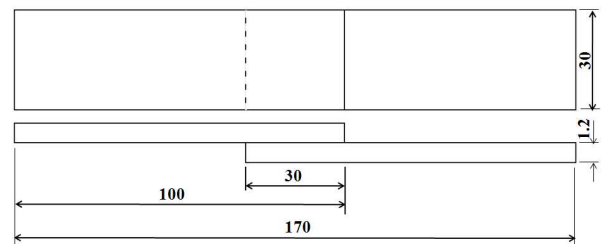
Schematic diagram of spot welded specimen for shear tensile test (unit : mm)
